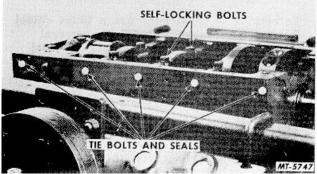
Main Bearing Cap Bolts, Tie Bolts and Seals
